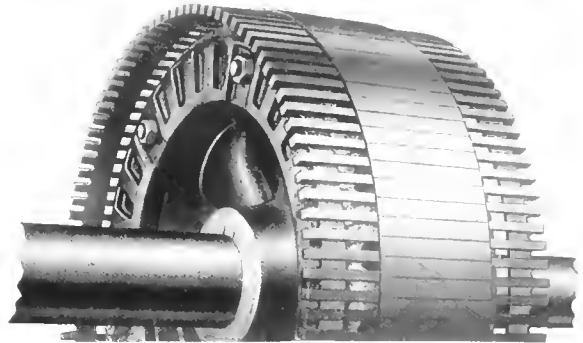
A Squirrel Cage Rotor with Welded End Rings
